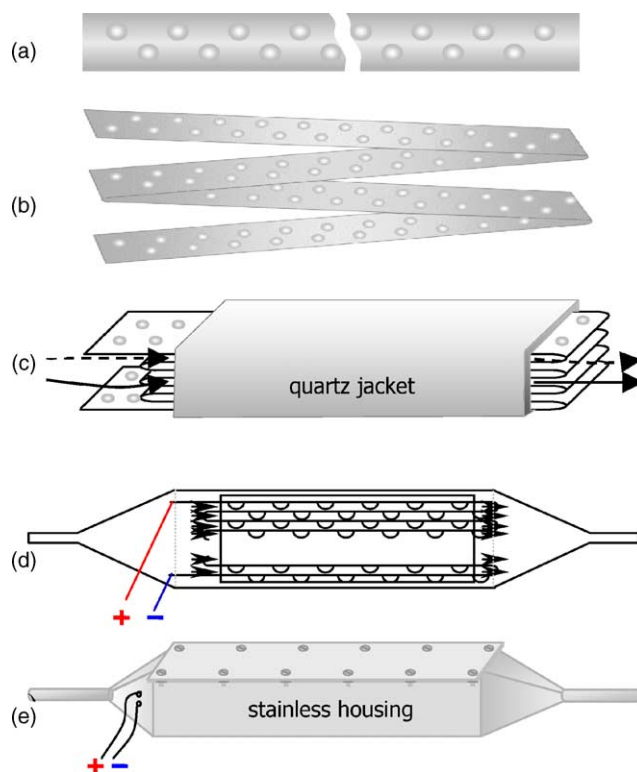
Microchannel reactor assembly. (a) Metal alloy belt with dimples; (b) bending of the belt; (c) quartz jacket and flowing modes; (d) interior details, and (e) exterior appearance.
